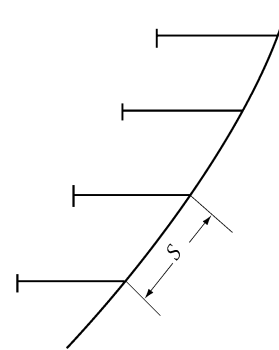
Measurements and shell plating stiffened in a spacing S
